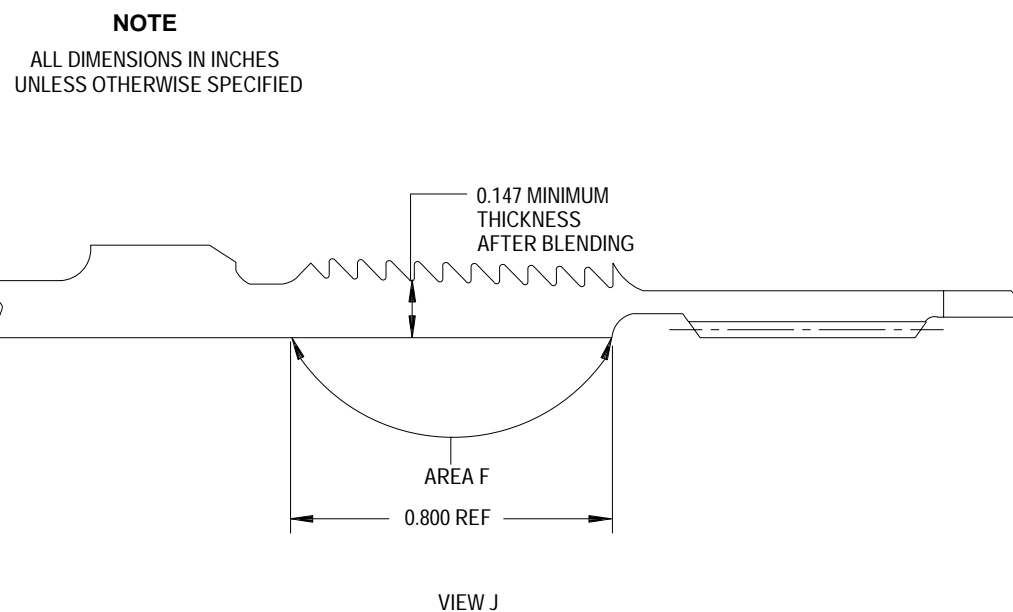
Disk-Drum Rotor, Rear Compressor, Rear, Assembly - Blend Repair (Sheet 5 of 6)
